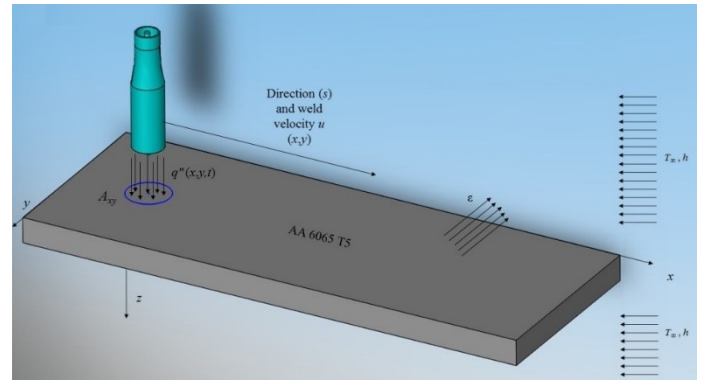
Scheme representation of the three-dimensional thermal welding process.
